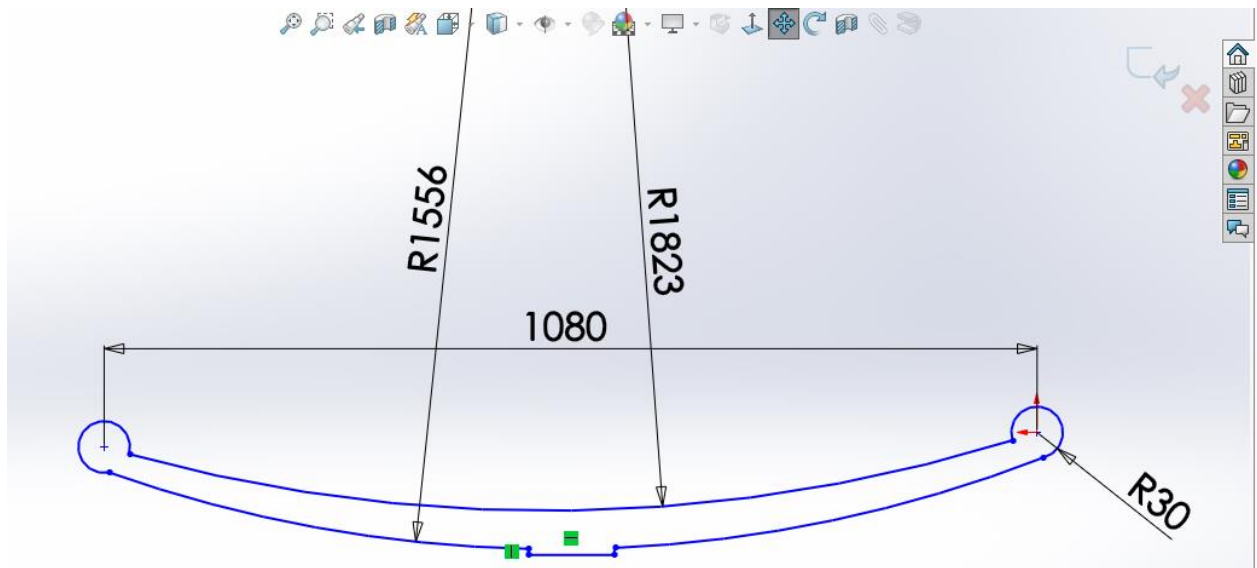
Two-Dimensional Sketch of Composite leaf
